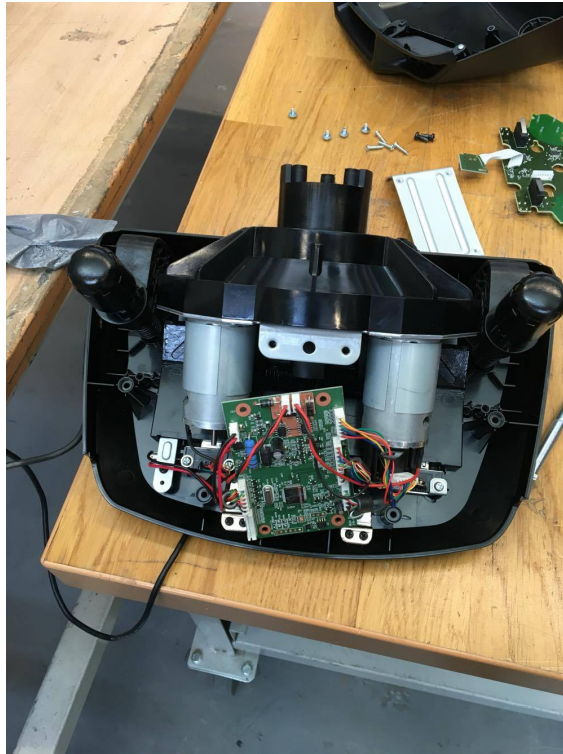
The steering wheel engine case opened. The circuit board in the top right corner was located in the gaming steering wheel and had to be connected to the circuit board in the engine.
